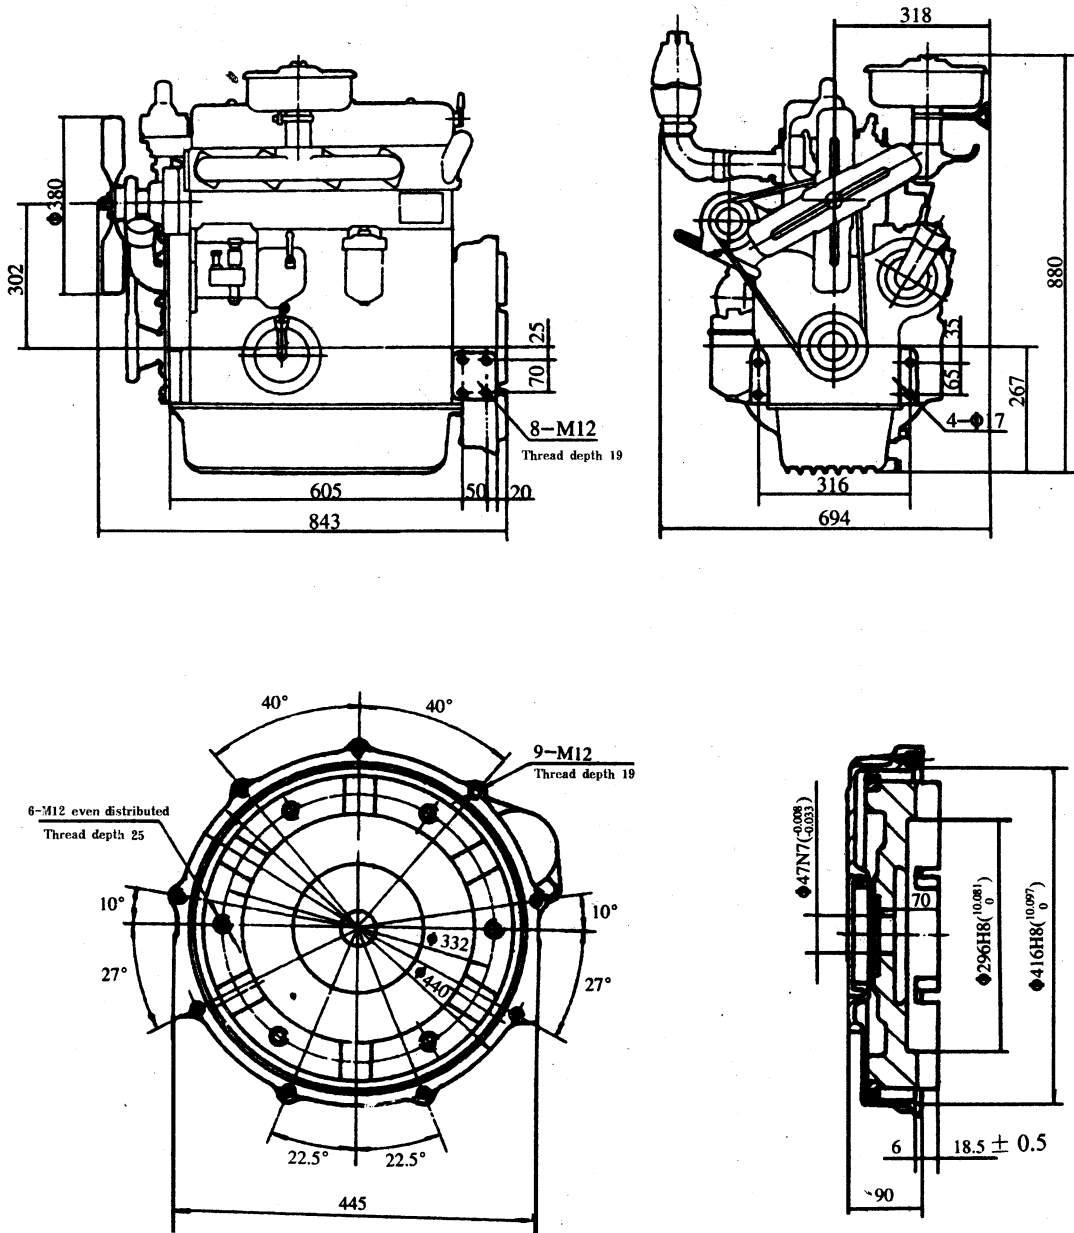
Outline drawing for 495, 495G, K4100 diesel engine
